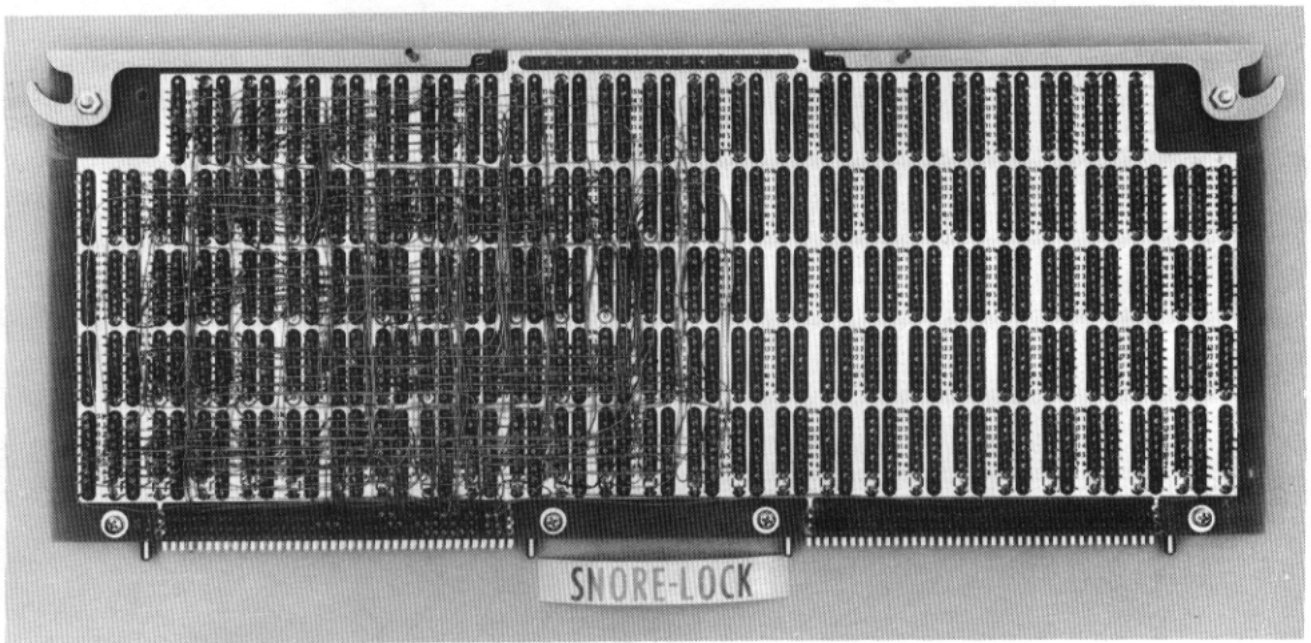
Wiring side of SNORE-LOCK wire-wrap card
